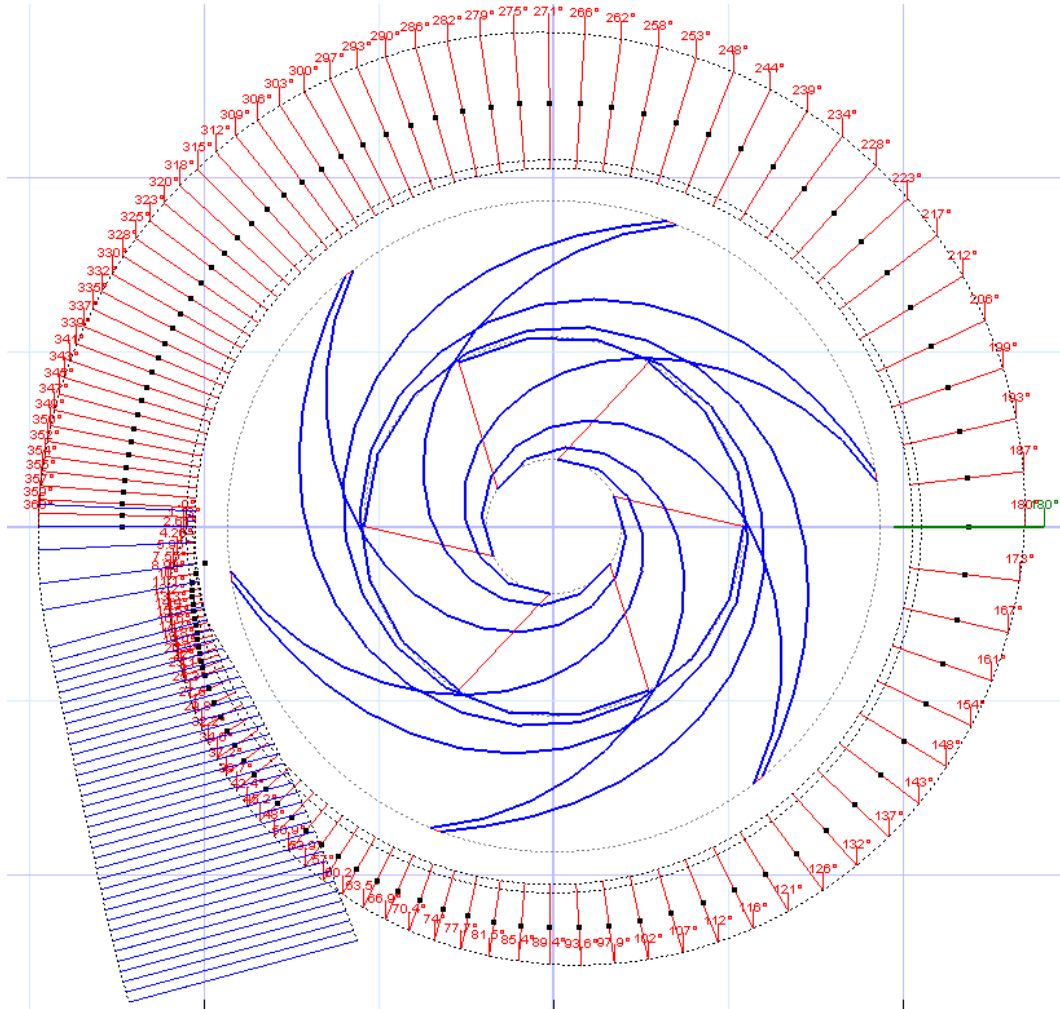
The pump layout showing the cross sections used to define the volute.
